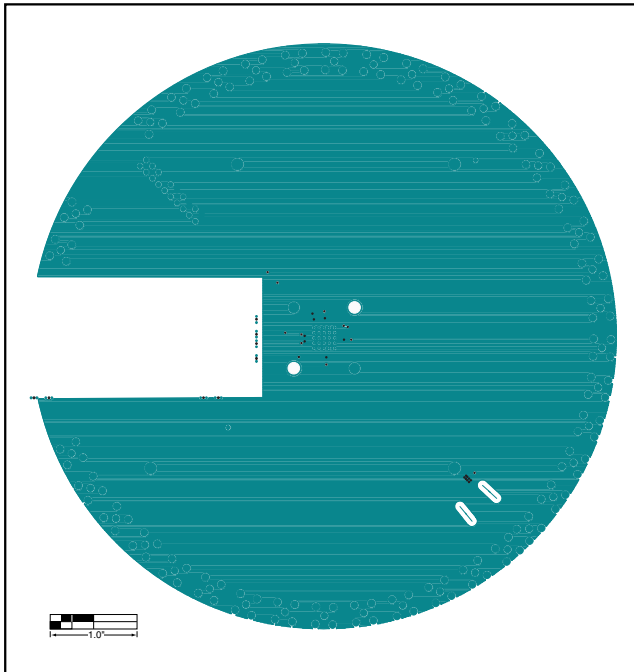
MAX3953 EV Kit PC Board Layout—Power Plane
